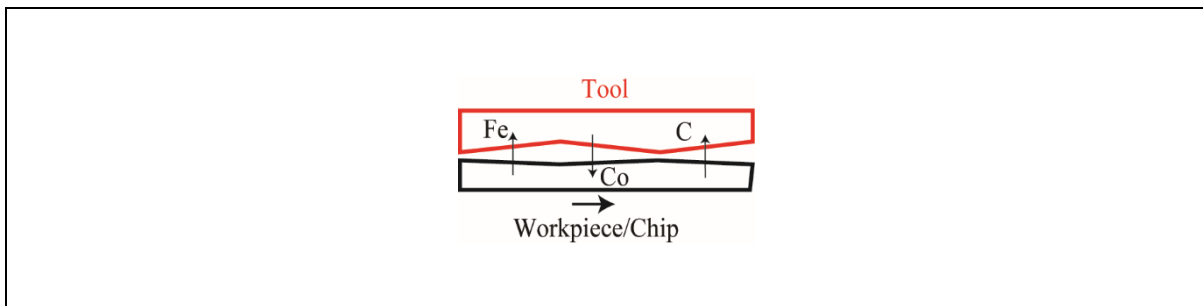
Schematic of diffusion when cutting steel with uncoated tungsten carbide.
